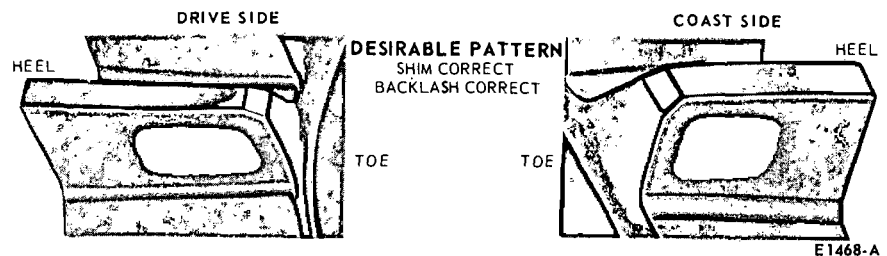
Ideal Tooth Pattern—Integral Carrier Type Axle
